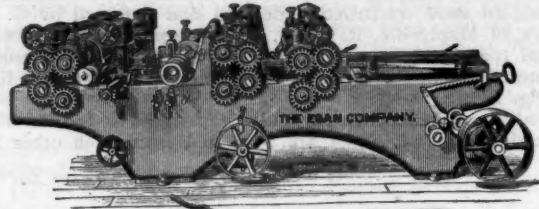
SPECIAL RAPID-FEED FLOORING MACHINE.
